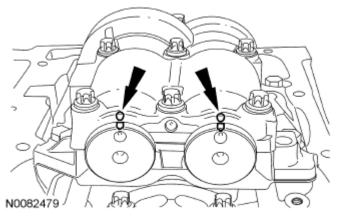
Locating Balancer Unit And Shafts Reference Mark Courtesy of FORD MOTOR CO.
